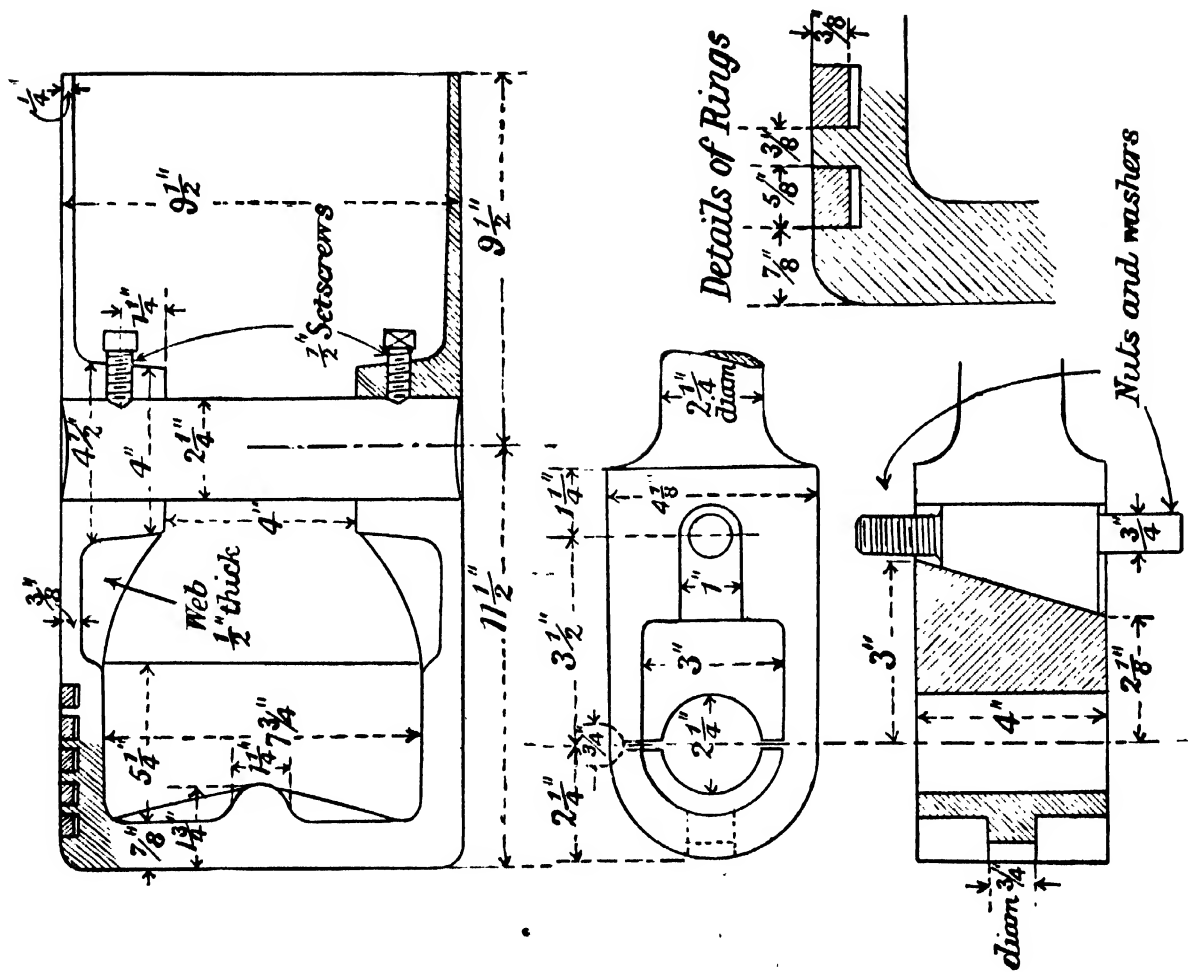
Piston and Connecting Rod End for Gas Engine.
